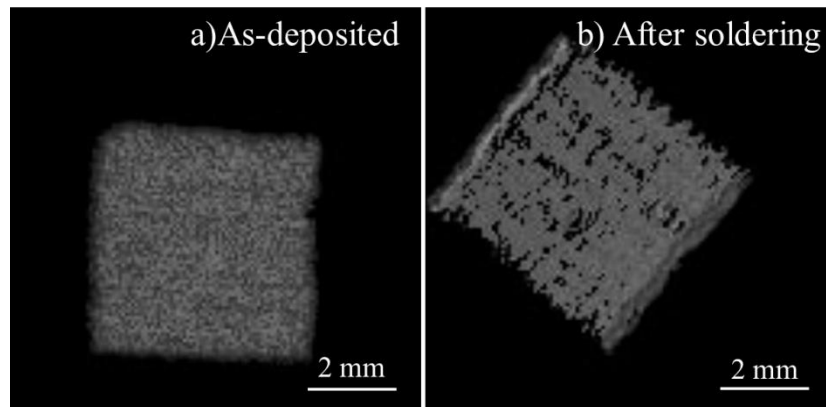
SAM images of the Cu/Zn-Al solder interconnects: a) As-deposited specimen; b) After soldering process.
